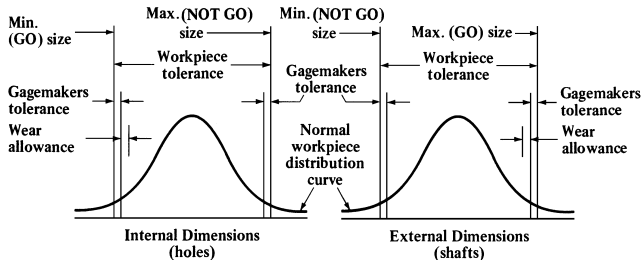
Relationship between Gagemakers Tolerance, Wear Allowance and Workpiece Tolerance
